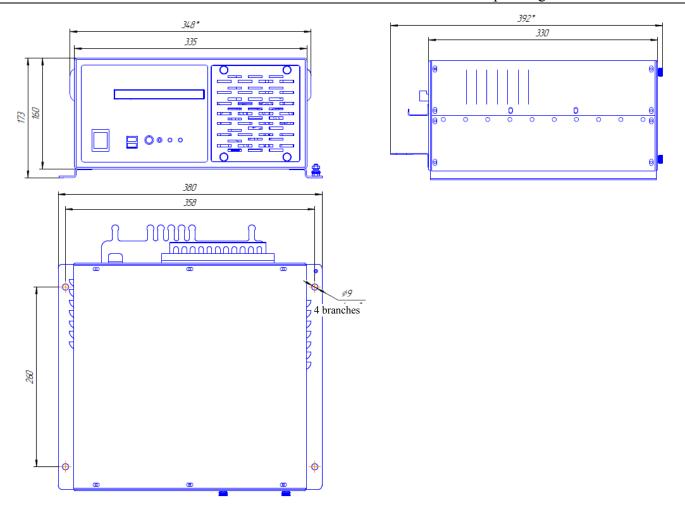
Dimensional Drawing of the Mainframe with Brackets
